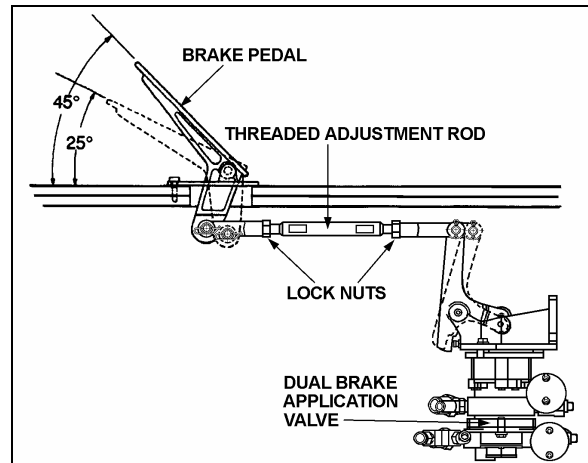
BRAKE PEDAL ADJUSTMENT
